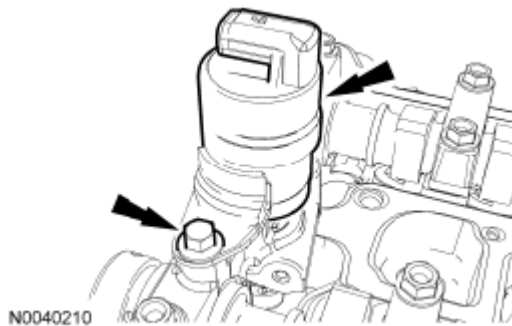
Locating Bolt & Variable Camshaft Timing Solenoid
